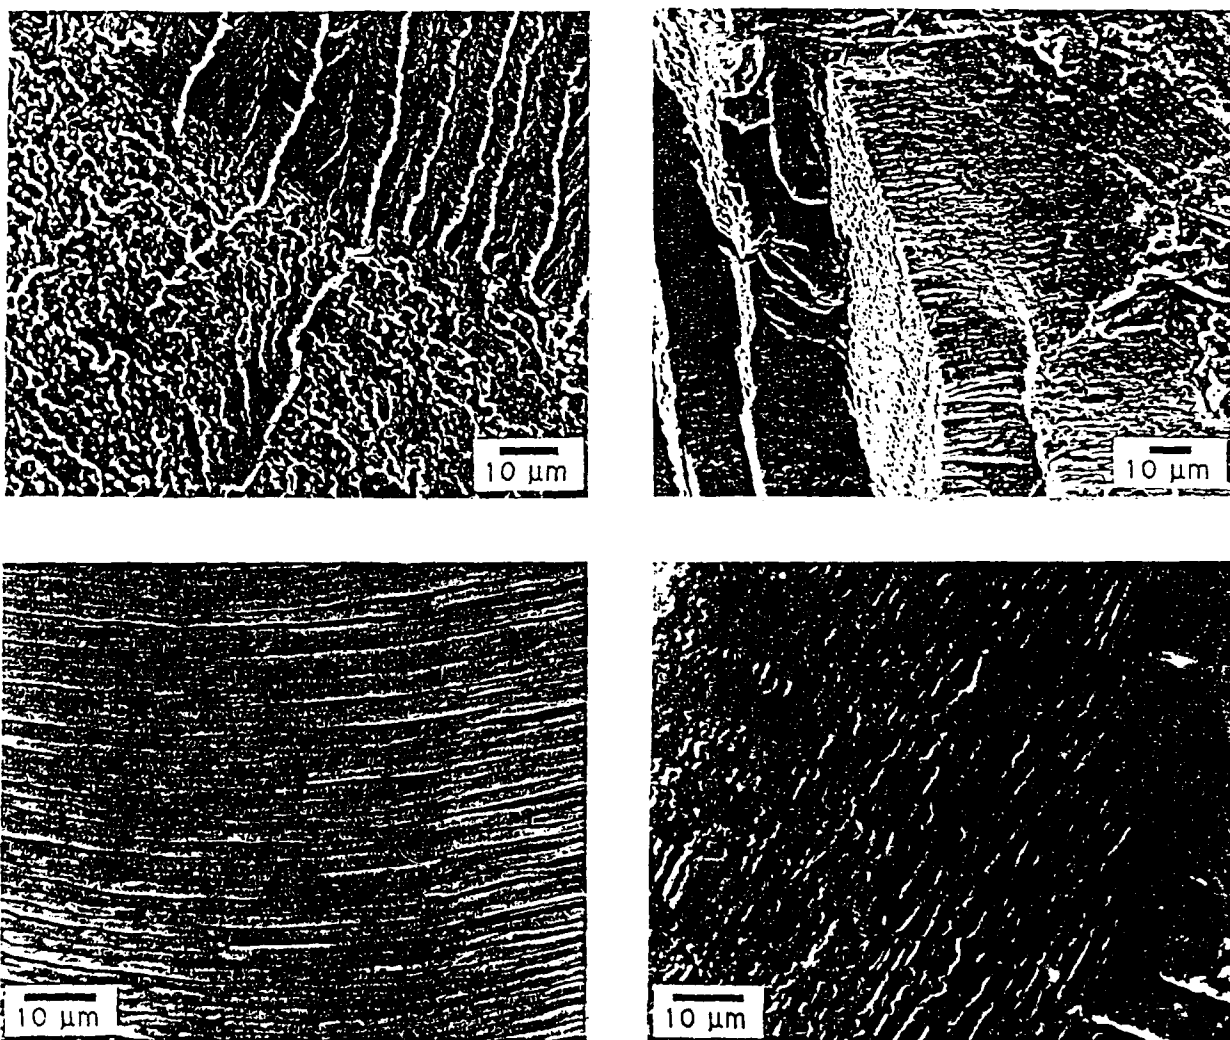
Fracture Surface Morphologies in both Air and Vacuum a) : difference in cleavage appearance in air (upper right) and vacuum (lower left) (b) : intersecting cleavage planes with crack growth plane in vacuum (c) : appearance of striations in air (d) : appearance of striations in vacuum.
